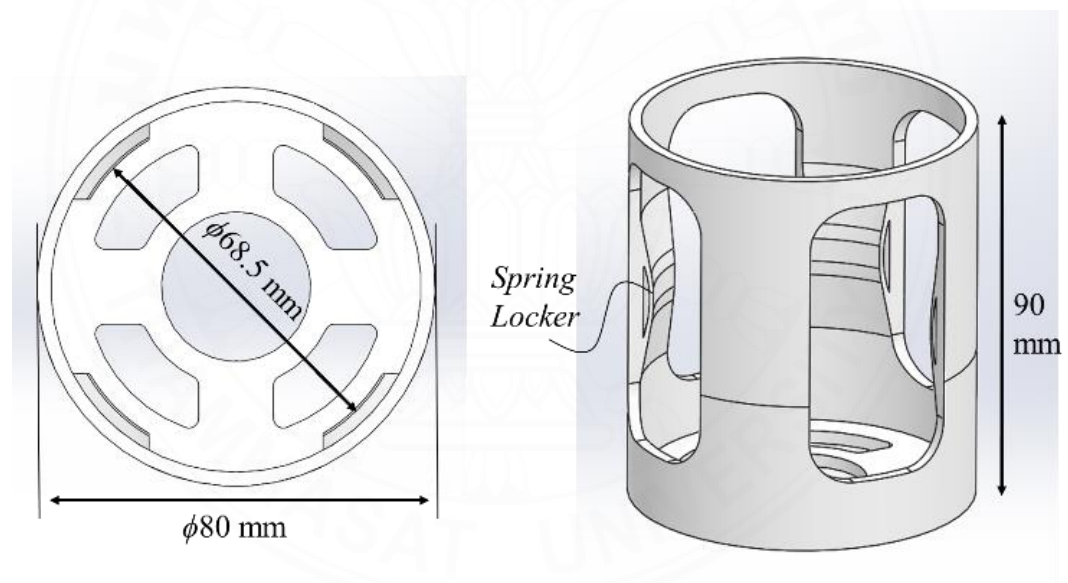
Second proposed design of the insert for plugging into crate sockets.
